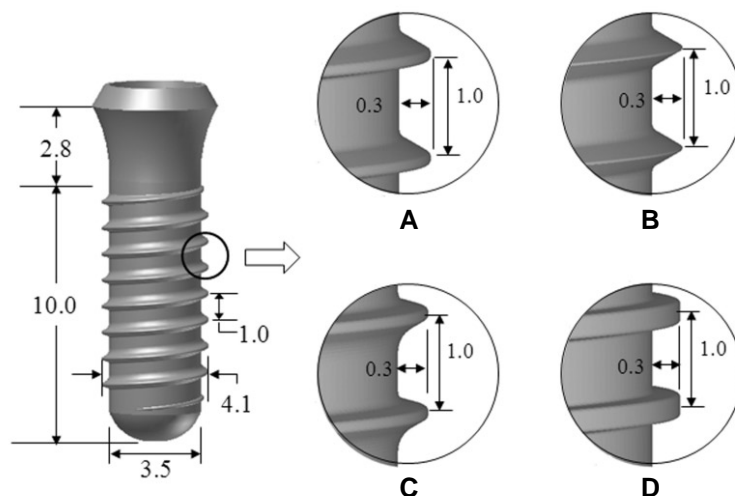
Cylinder shaped implant body that incorporates four different thread profiles: (A) buttress thread, (B) V-shaped thread, (C) reverse buttress thread, and (D) square shape thread (unit: mm).
